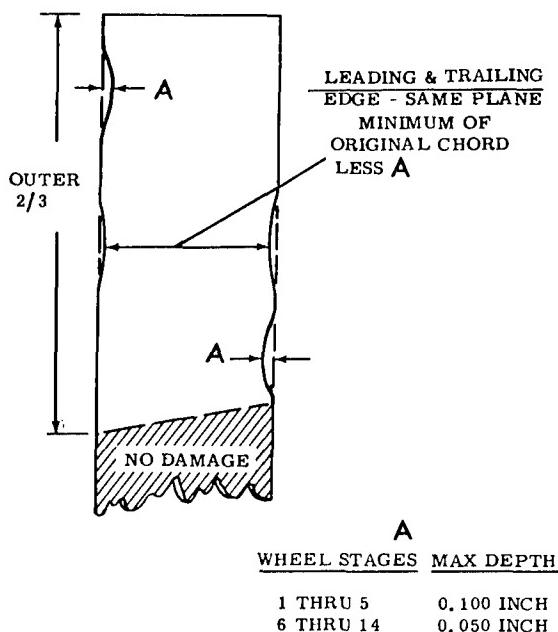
Compressor blade leading and trailing edge damage limits.
